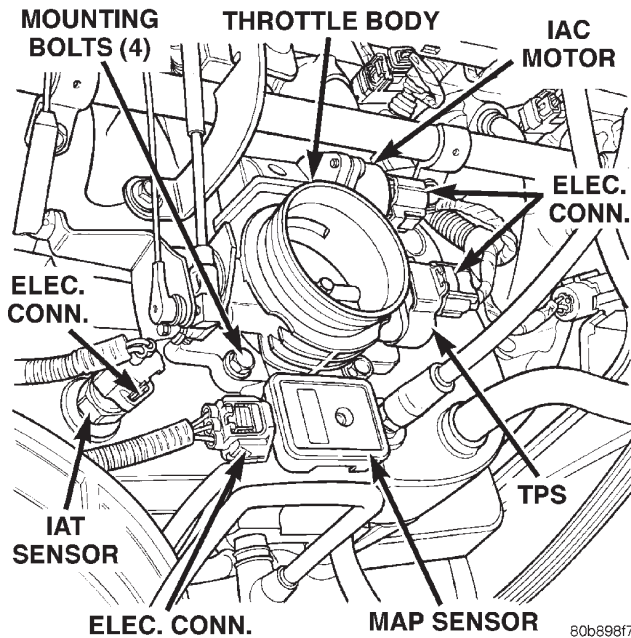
Throttle Body and Sensor Locations—4.0L Engine
